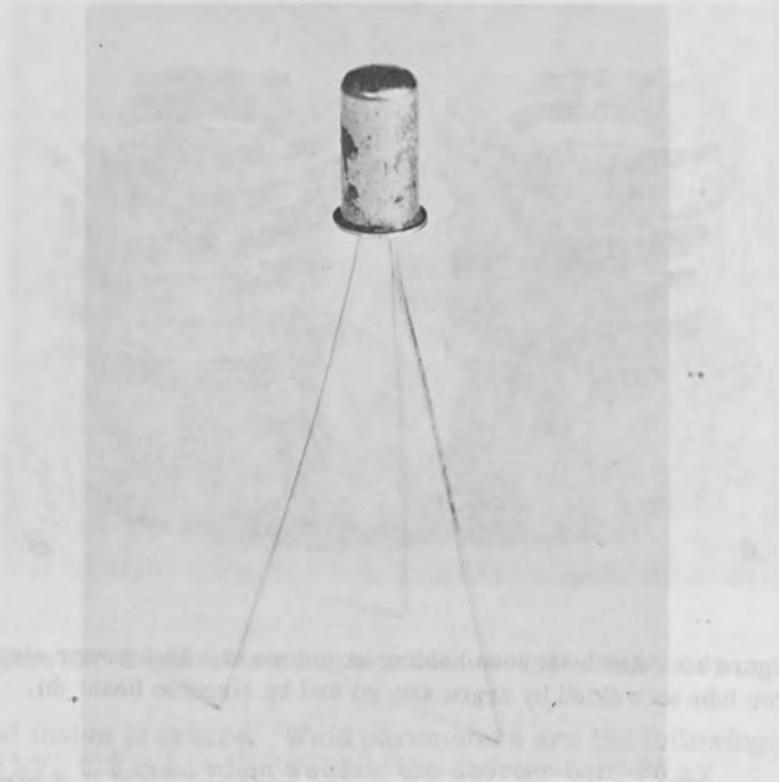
° Small power transistor closed by electron beam welding.
